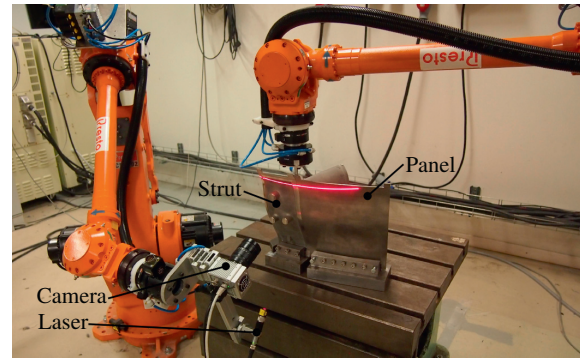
System setup. The alignment robot is in contact with the panel, manipulating its shape by pushing or pulling on one of the upper corners.
